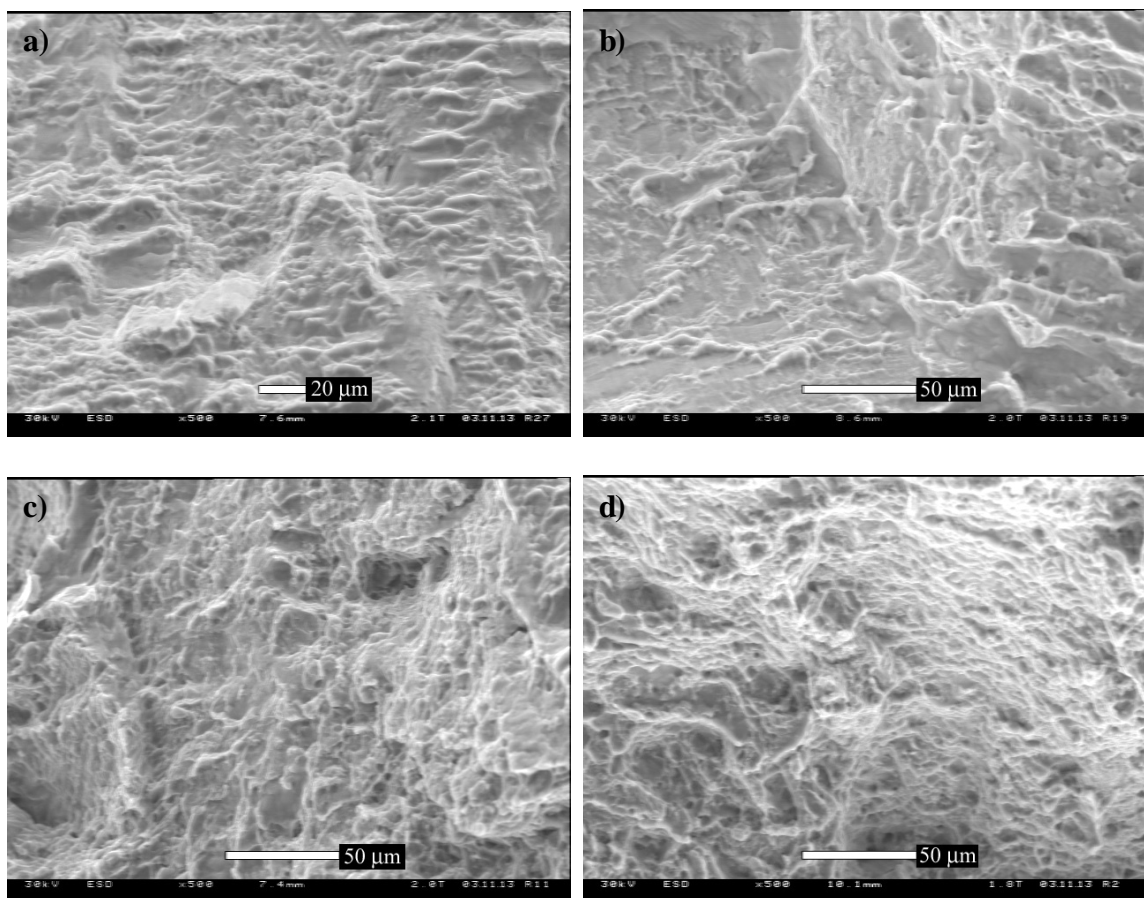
Fracture surfaces of tensile specimens, 500x. (a) Base metal, (b) matching filler metal weld, (c) modified 50 ppm Y filler metal weld, and (d) modified 200 ppm Y metal.
